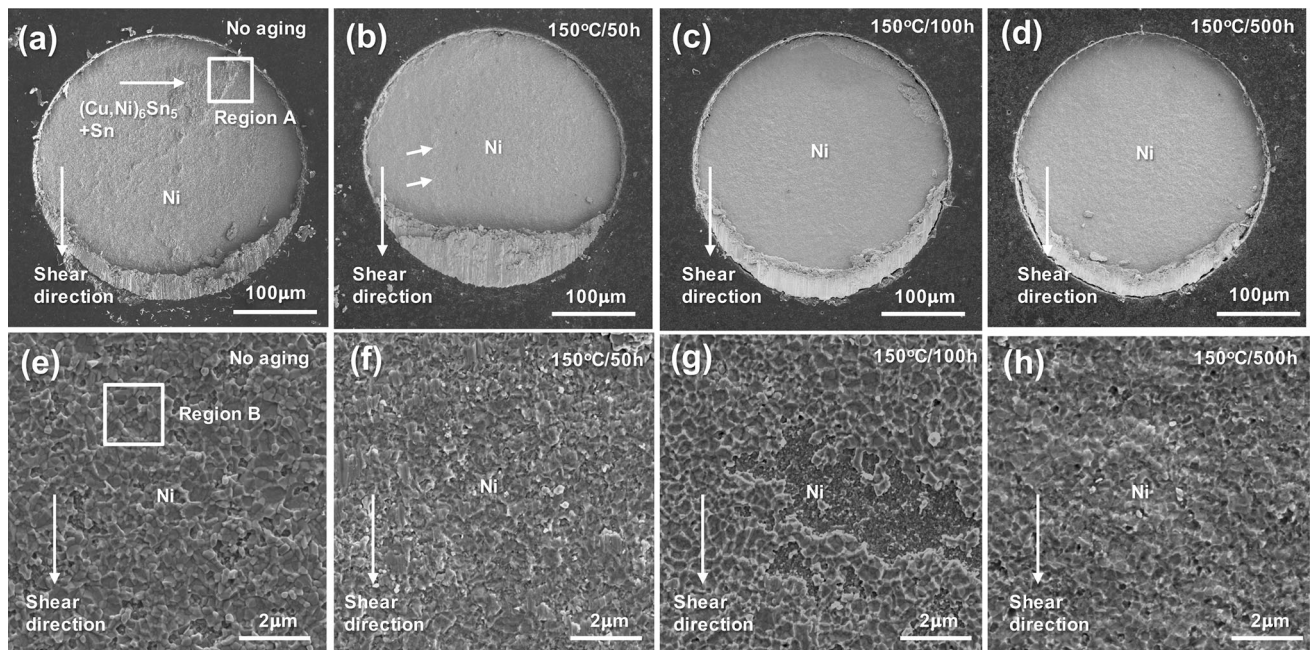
Scanning electron microscopy images of the fracture surface in the solder joint with the NiAu surface finish after shear testing in a -196°C temperature environment with the isothermal aging condition. (a), (e) Shear test after no aging; (b), (f) shear test after $150^{\circ}\text{C}/50\text{ h}$ aging; (c), (g) shear test after $150^{\circ}\text{C}/100\text{ h}$ aging; and (d), (h) shear test after $150^{\circ}\text{C}/500\text{ h}$ aging. (e), (f), (g) and (h) High-magnification SEM images from the midsection of each aging condition fracture surface. The arrows in (a) and (b) indicate the $(\text{Cu}, \text{Ni})_6\text{Sn}_5$ and residual Sn mixed region.
